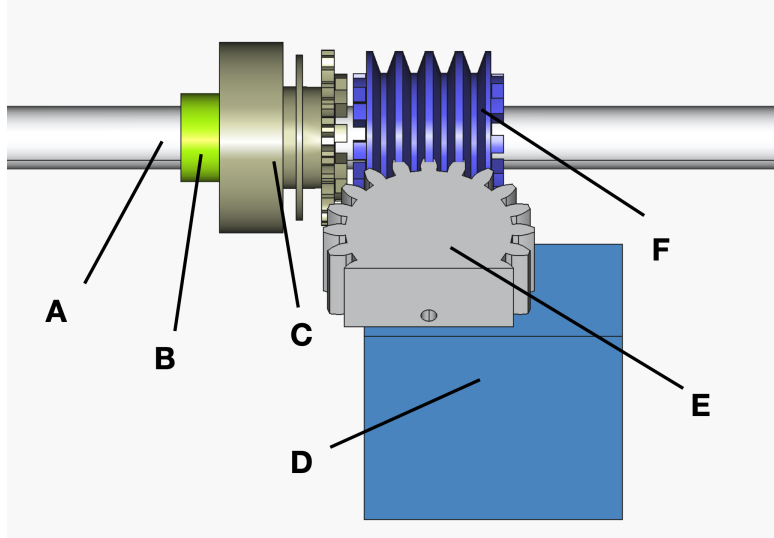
Basic design of the Actron. Part A is the rotating shaft supplying mechanical power. Part B is a ball bearing allowing Part C to rotate freely about the shaft. Part C is connected to the tendon driving the mechanical joint. Part D is a generic servo motor controlling the position of the sliding element F through screw E. Part F is coupled to the shaft by a parallel key, allowing axial motion while remaining rotationally locked to the shaft. When the servo rotates E, F is displaced towards C, mechanically engaging the tendon with the rotating shaft. A locking mechanism may also be added to prevent rotation while disengaged, although it is omitted here for clarity.
